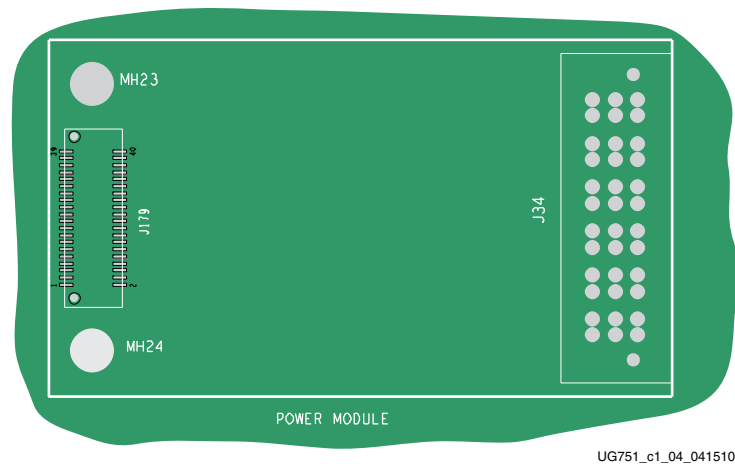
Mounting Location, GTP Transceiver Power Module
